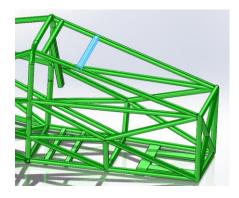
Image of the CAD of the chassis with the bar to be deleted highlighted
